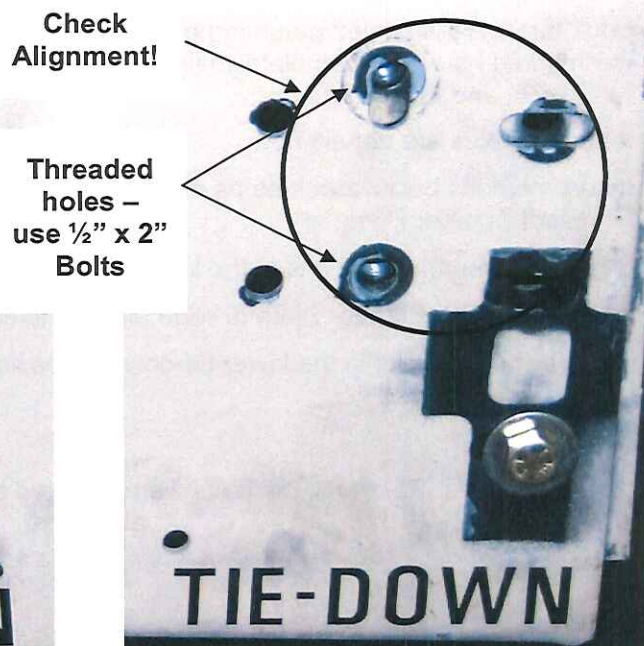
DETAIL OF DRIVER SIDE MOUNTING HOLES
